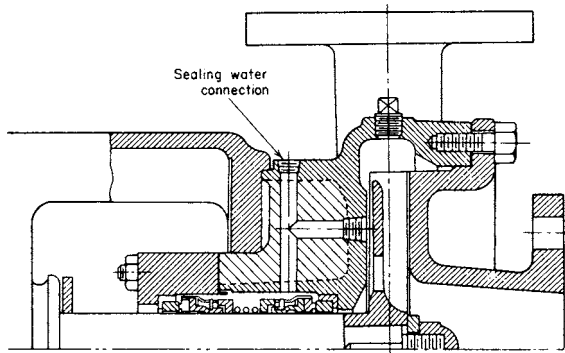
Single-stage end-suction pump with semi-open impeller and double mechanical seal.
